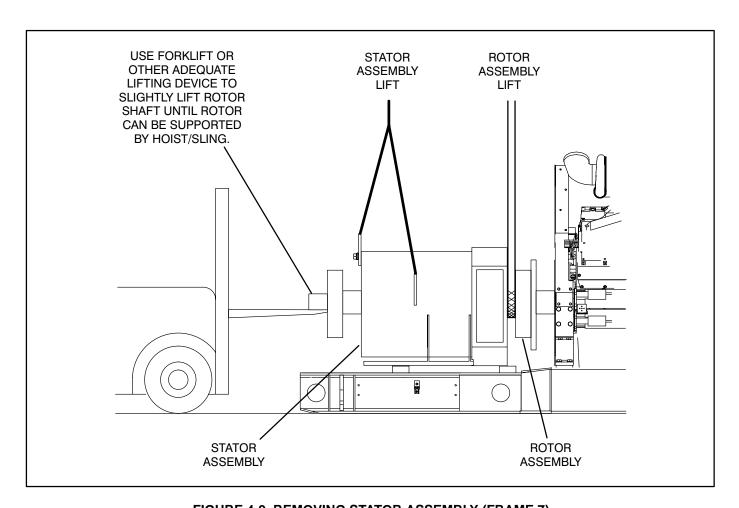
REMOVING STATOR ASSEMBLY (FRAME 7)
